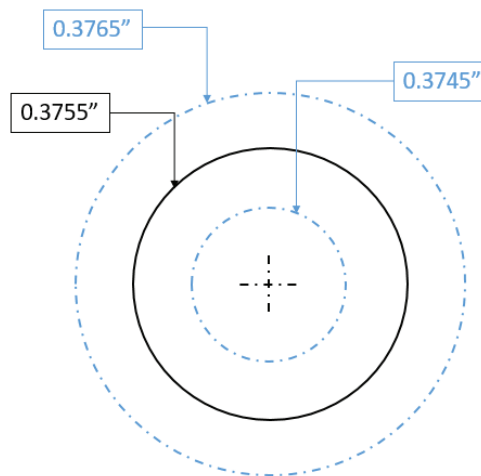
HOLE DIAMETER BILATERAL TOLERANCE EXAMPLE
